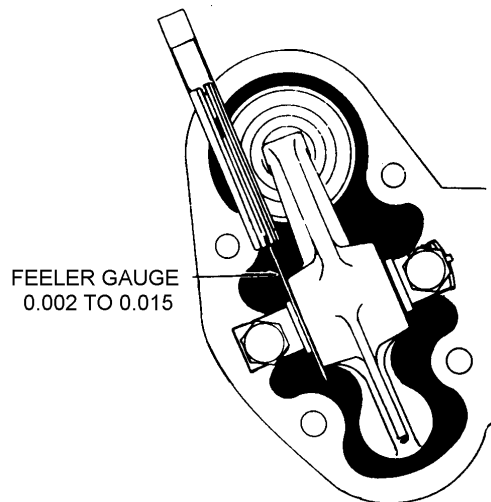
Crossflow Cylinder Rocker Arm Side Clearance
